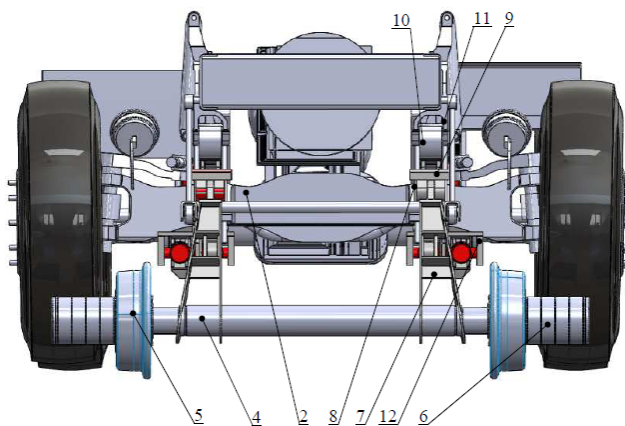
Rail running gear system with two axles (actuator is mounted under the front drive bridge) – front view
